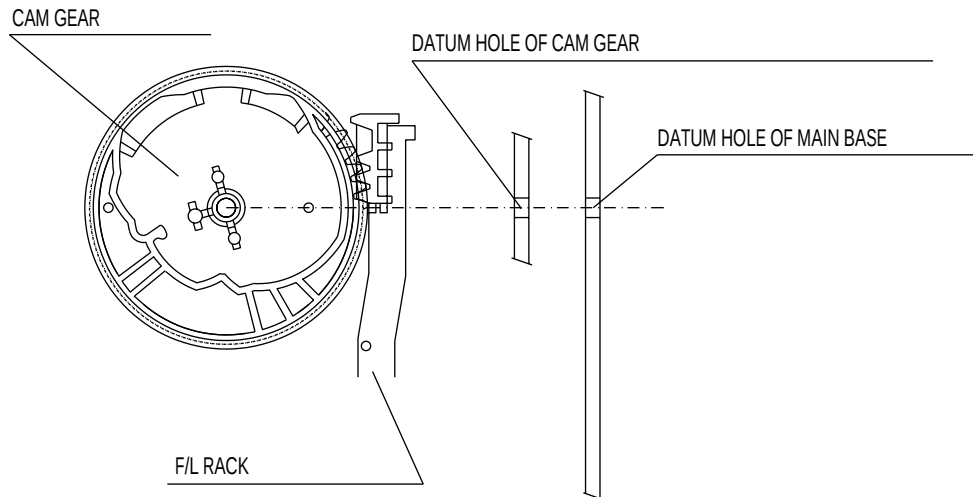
DATUM POSITION OF F/L RACK & CAM GEAR
